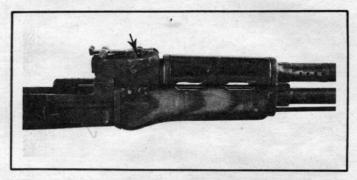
GAS CYLINDER TUBE IN LOCK POSITION
